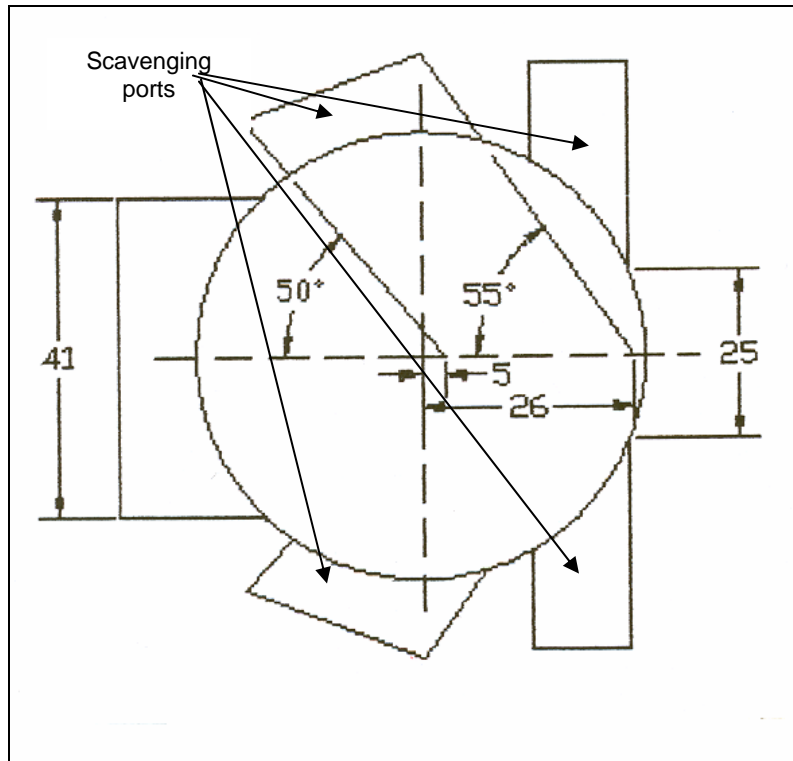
Various scavenge port plan layouts found in loop scavenging [28].
